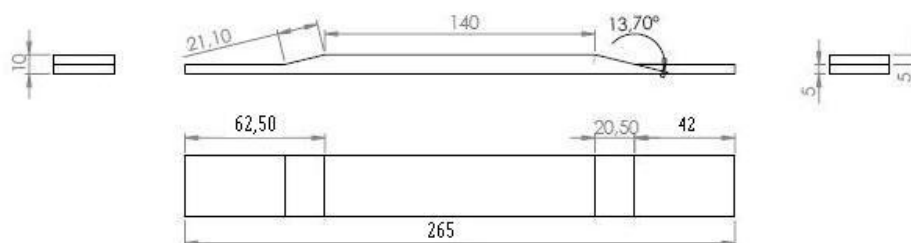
Side view and top view of the bars male tool (dimensions in mm).
